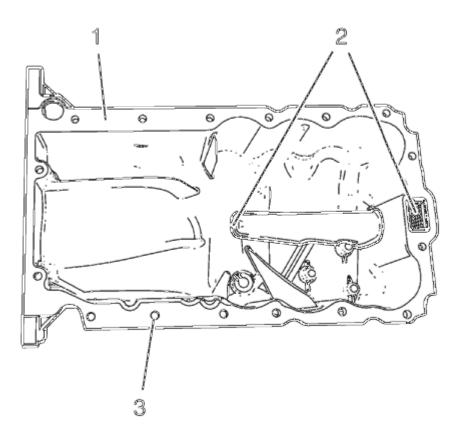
Locating Engine Oil Cooler Components Courtesy of GENERAL MOTORS COMPANY
